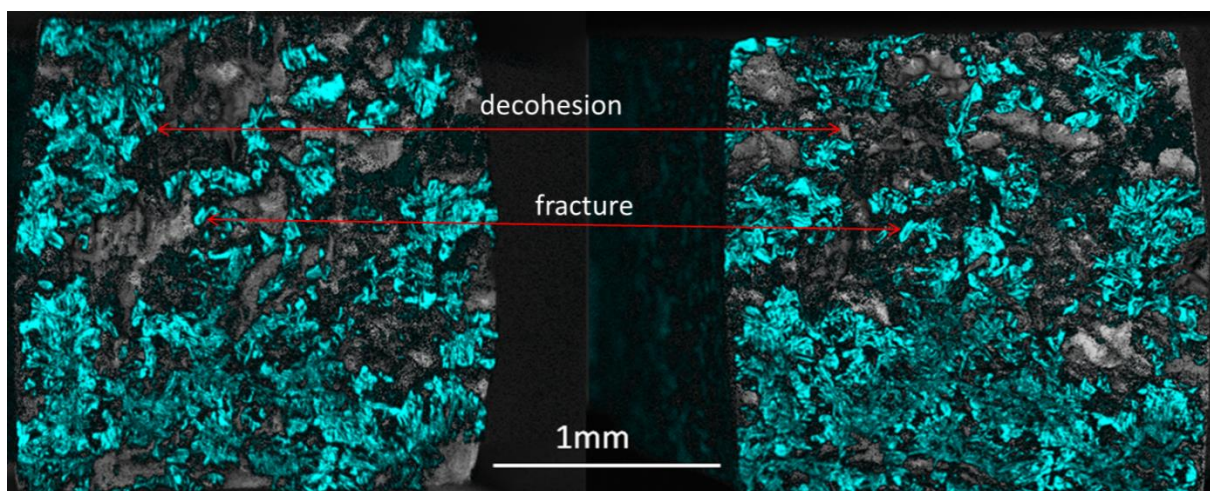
Example showing decohesion and fracture of eutectic Si in X-ray mapping images of two fracture surfaces of the same specimen
